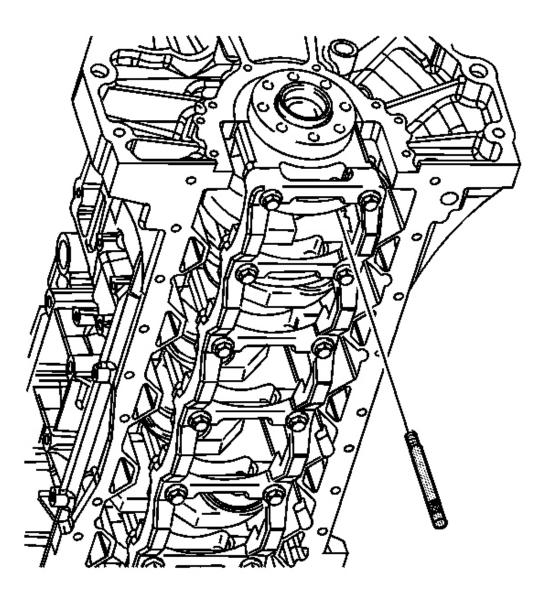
View Of J 41556 Courtesy of GENERAL MOTORS CORP.
